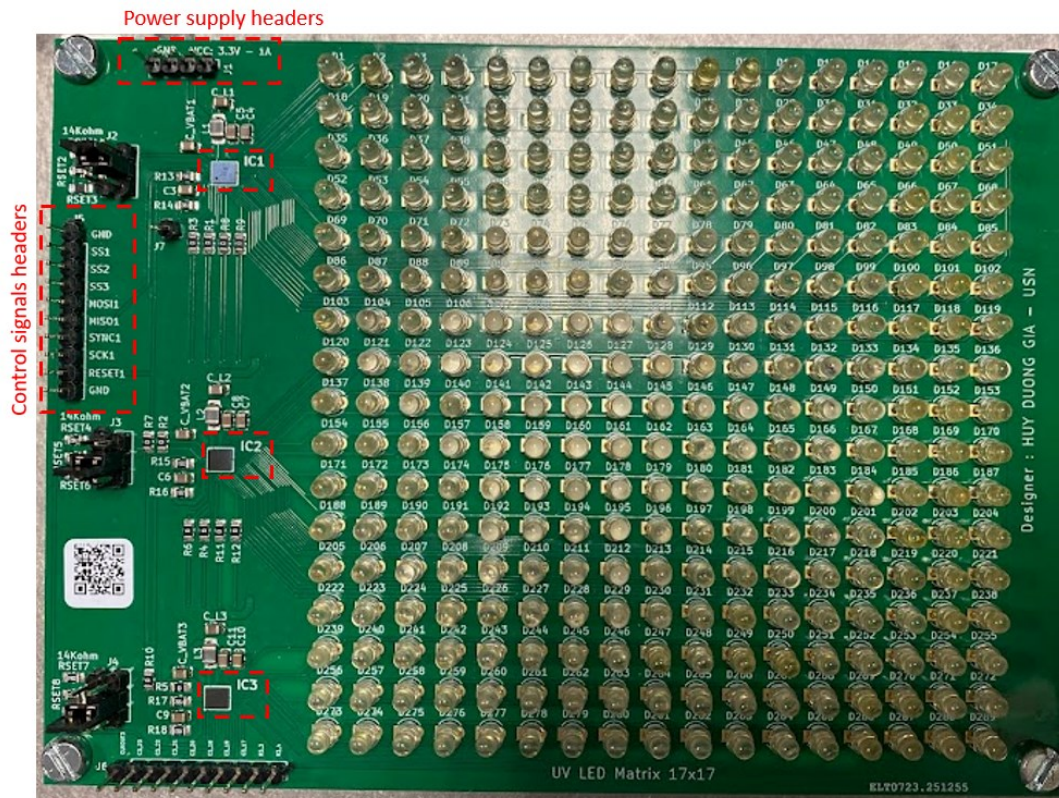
Our complete PCB of custom drive electronics with 17x17 IR LED matrix.
